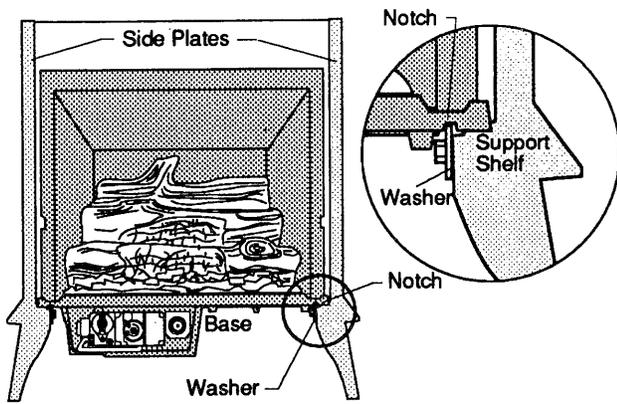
Install the Firebox Assembly. Be sure that the two large front washers engage both notches in the underside of the base.
